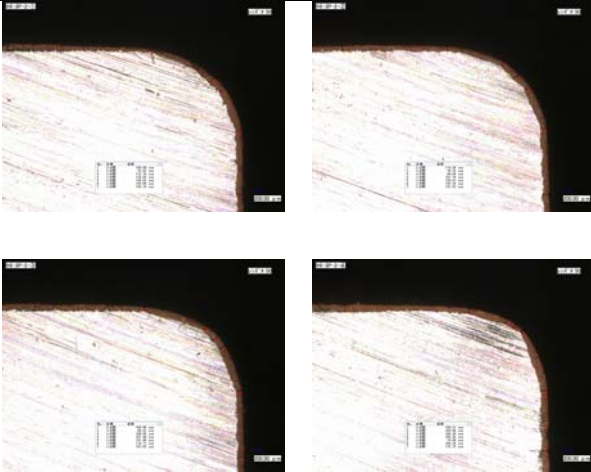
Examples of cross-section views of 3-path specimens (specimen C3P-2-1 ~ 4, Up: kerf, Right: front face).
